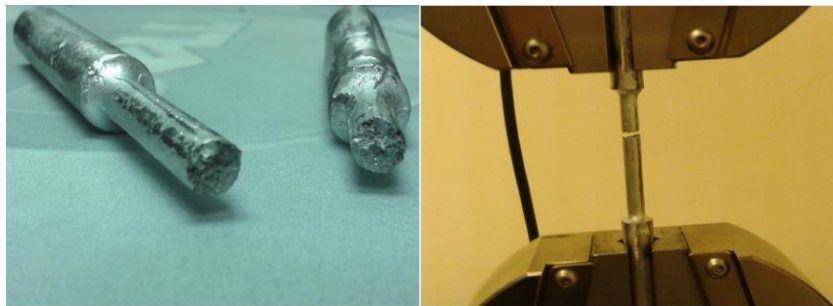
Brittle Fracture in the Spin Cast Specimen without necking during the tensile test
